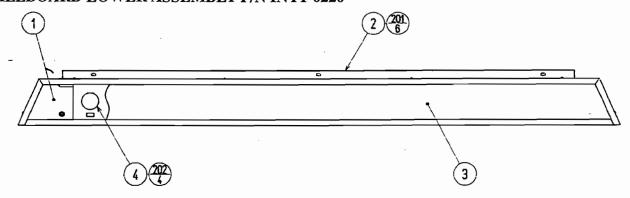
BILLBOARD LOWER ASSEMBLY
